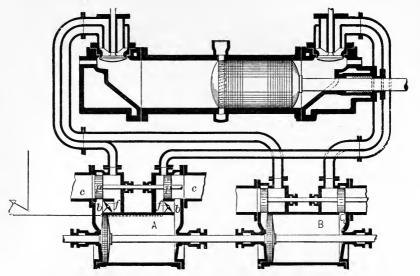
Valve Group of Koerting Two Cycle Gas Engine.
